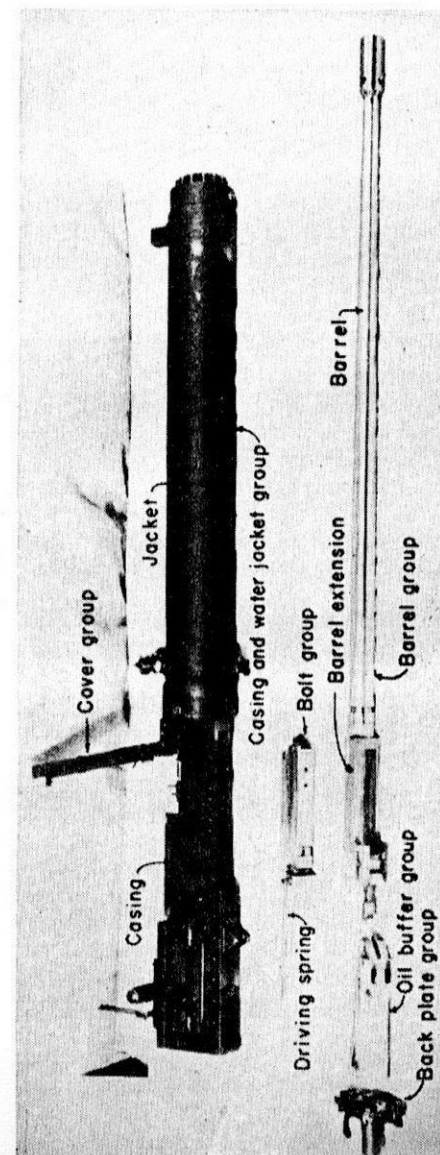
Part groups of caliber .50 machine gun, M2.
